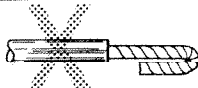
CONNECTOR SOLDERING WITH RESISTANCE UNIT
